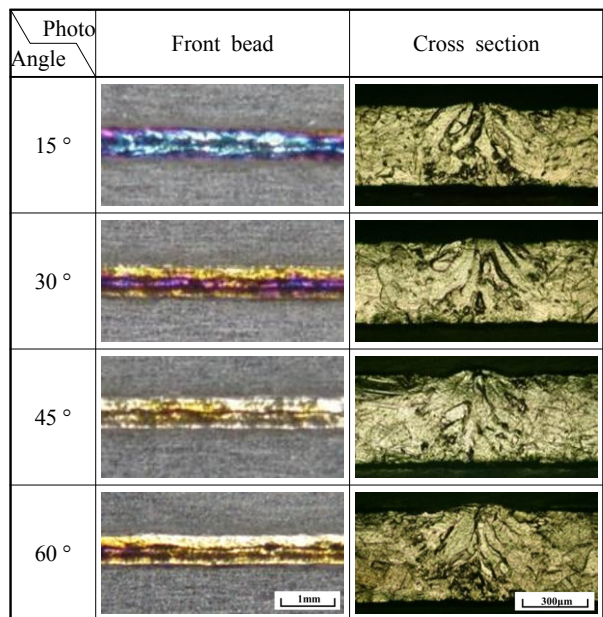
Various bead shapes with angle of side shield gas nozzle in bead welding($f_a=0$ mm, $P_L=500$ W, $v=10$ m/min)
